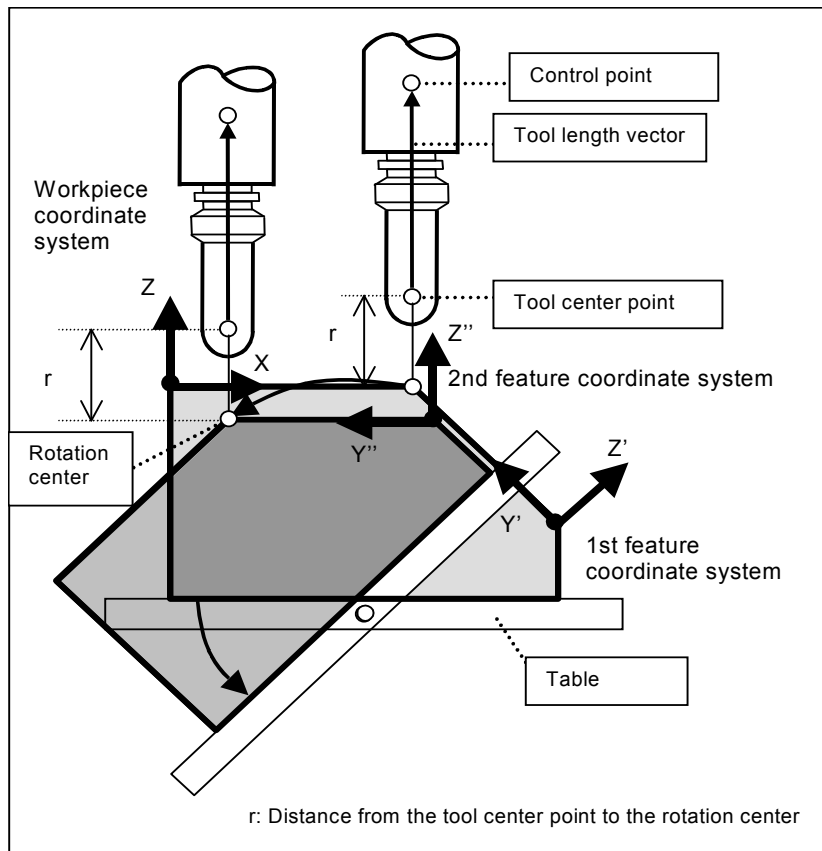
(f) Operation of rotation center compensation with tool center point retention type tool axis direction control (table rotation type)
